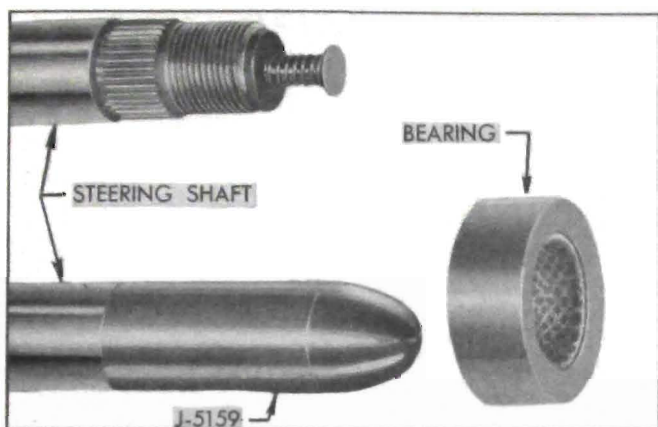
Steering Shaft, Bearing, and Bearing Protector
